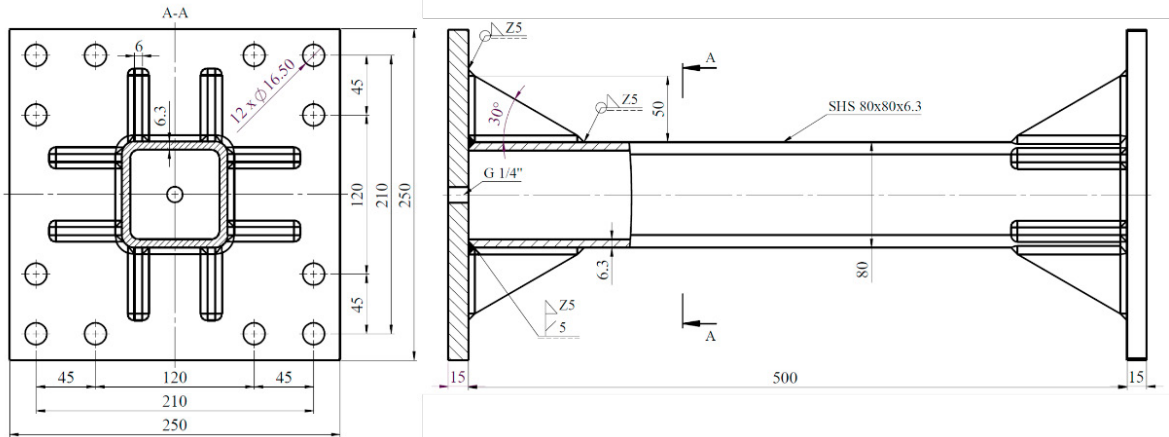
Tube-to-flange steel welded joints with reinforcement ribs. Dimensions of the tested specimens (in millimeters).
